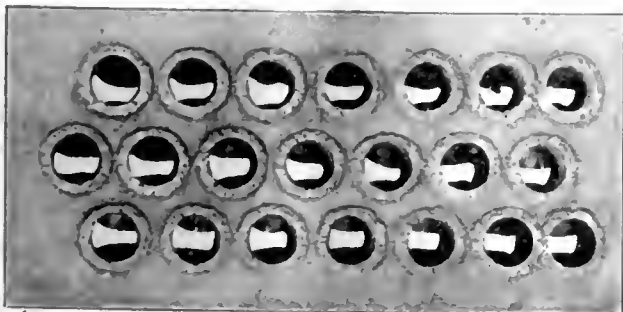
SMALL SECTION OF LOCOMOTIVE FLUE SHEET, TUBES IN PLACE AND READY FOR WELDING.
